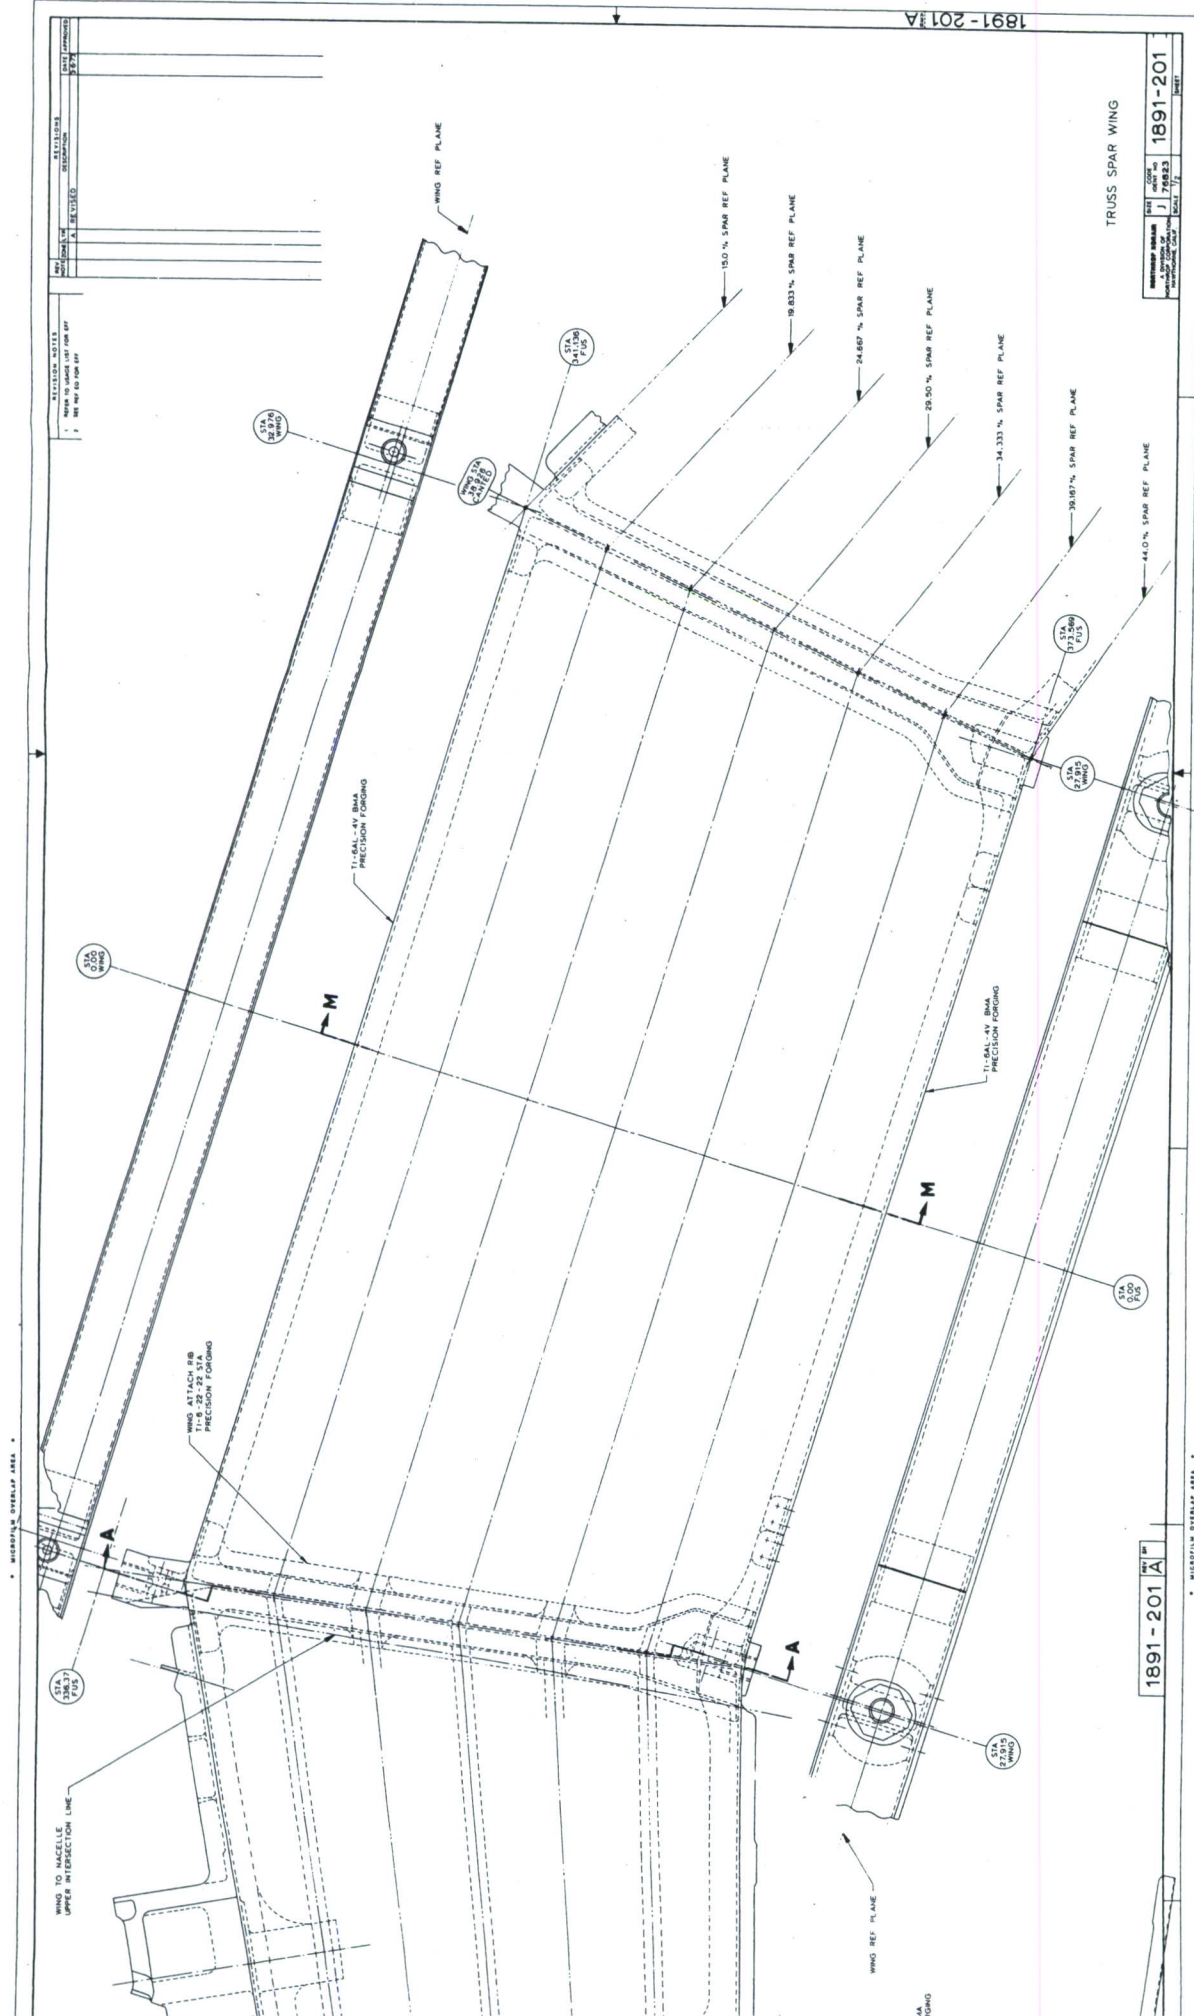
CONCEPT NO. 2 WARREN TRUSS SPAR WING
